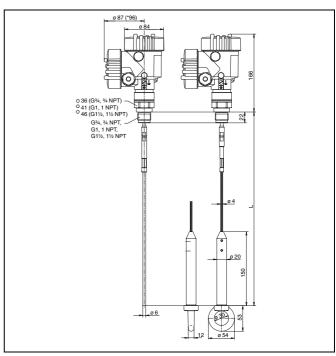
VEGAFLEX 61 - cable and rod version with thread (double chamber housing)
